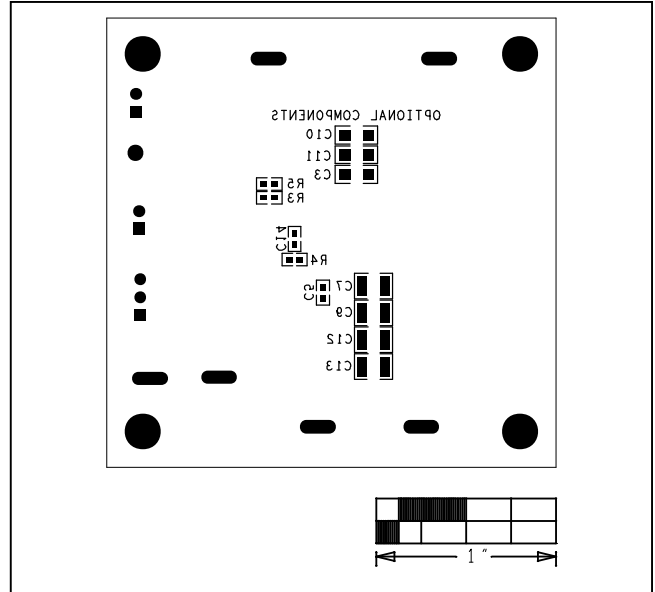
MAXM17544 EV Kit Component Placement Guide—Solder-Side
